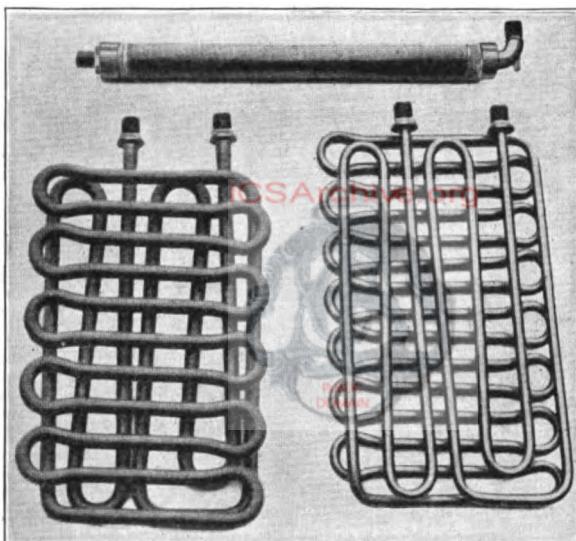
Wire-Wound and Plain Tube Sections and Wire-Wound Steam Drum of Sheppée Flash Generator
